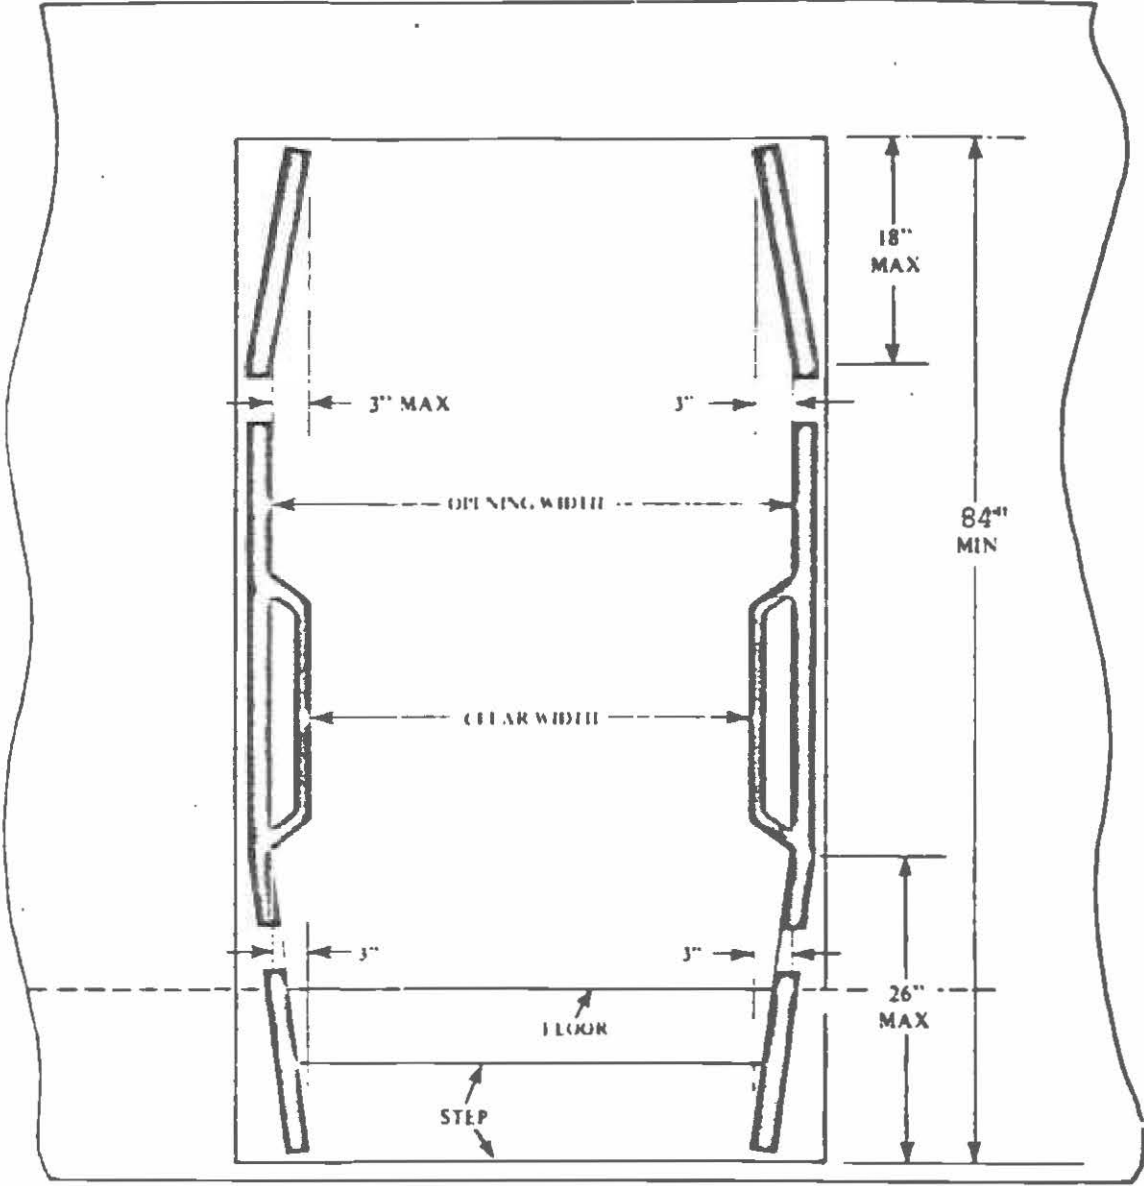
TRANSIT COACH MINIMUM DOOR OPENING
